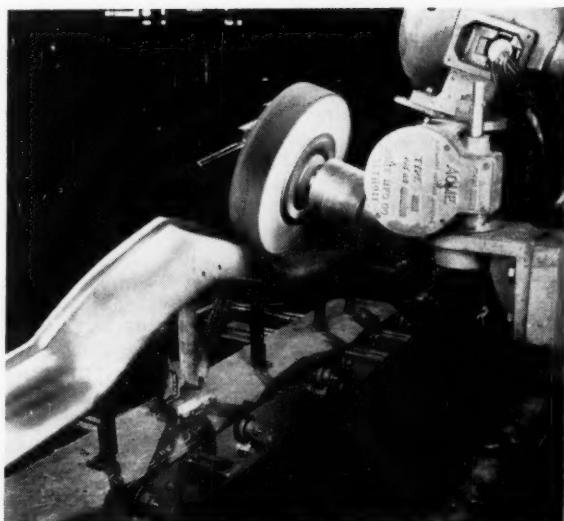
Demonstrating how the Kon-Toor wheel is adaptable to polishing the most intricate equipment, it is shown mounted here on a full floating head, following the contours of a complete automobile bumper. The wheel can polish angular as well as curved surfaces of a part.
